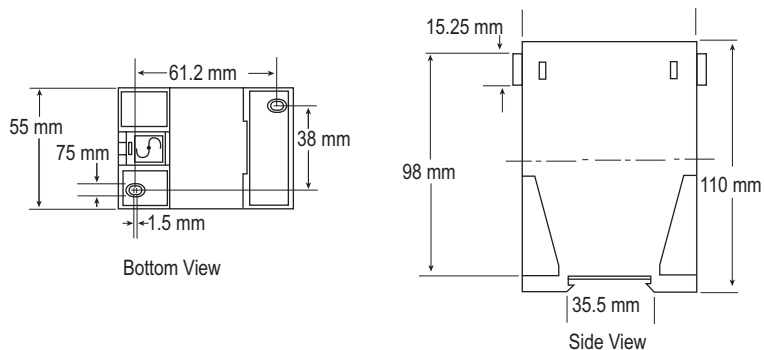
Mat Controller MC3 Dimensional Drawing
